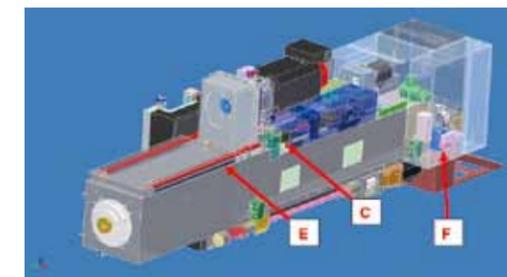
Hydraulic compensation mechanism for Ram-type housing
